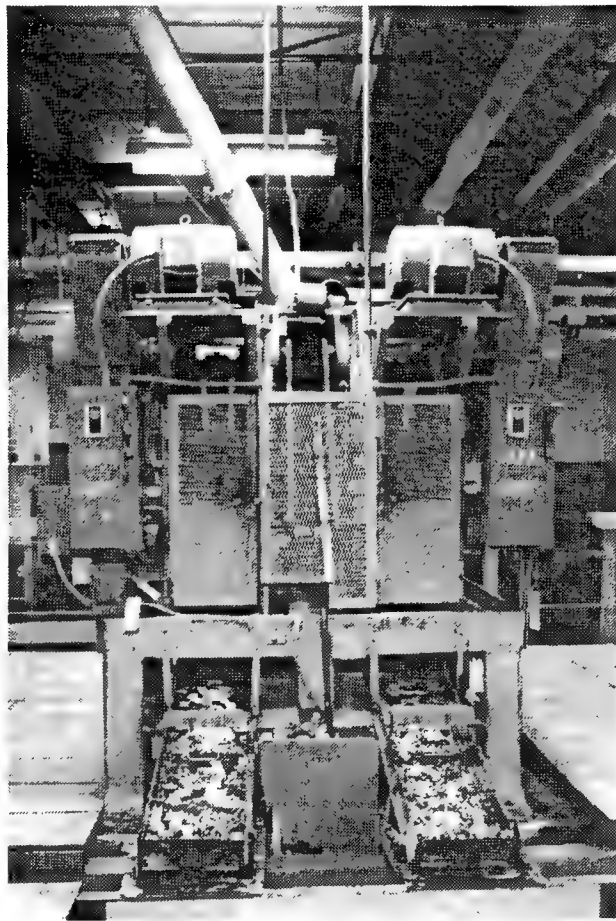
Building 3: First Bullet Jacket Draw Machine manufactured by E. W. Bliss Co.
